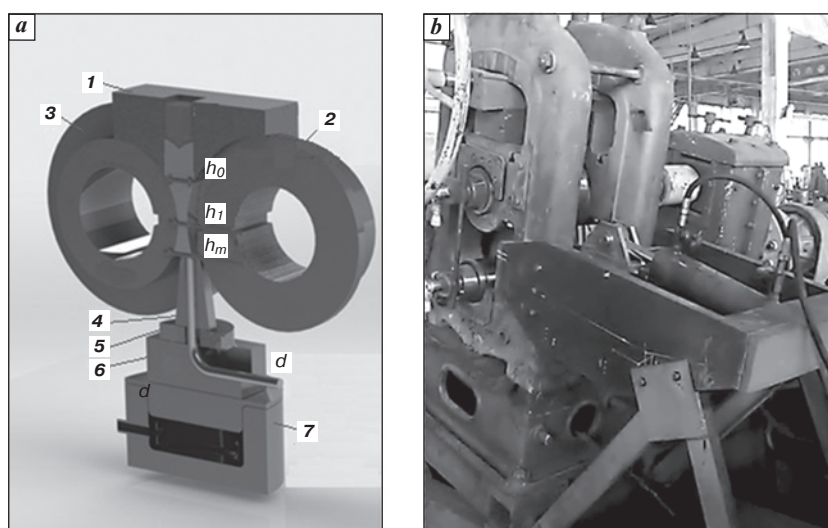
Device for implementing the ingotless rolling-extrusion method (*a*) and CRE-400 installation (*b*): 1 – filling groove, 2 – roller with protrusion; 3 – roller with groove; 4 – die; 5 – die holder; 6 – slide; 7 – hydraulic clamp (photo by authors)
